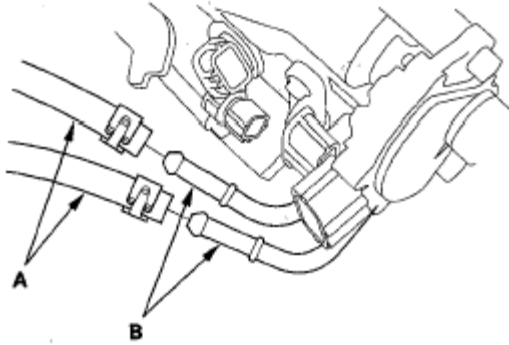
Identifying ATF Cooler Hoses And ATF Cooler Lines
